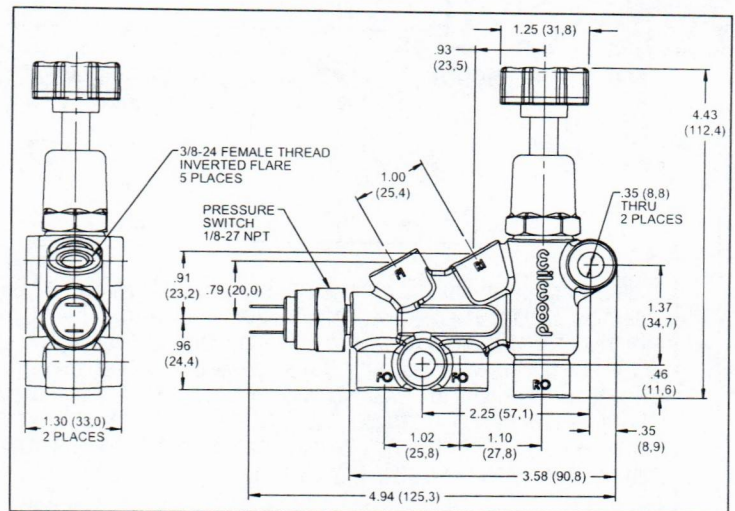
Combination Proportioning Valve, Knob Style, Mounting Dimensions
